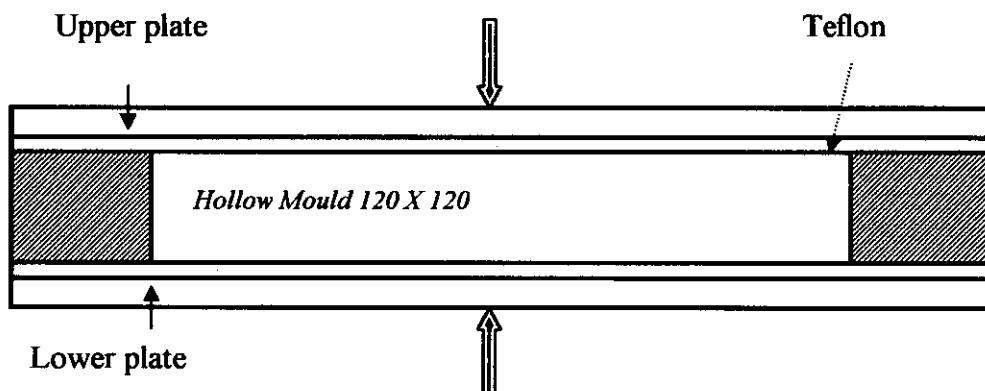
Schematic drawing of mould used in manufacturing bulk adhesive.
